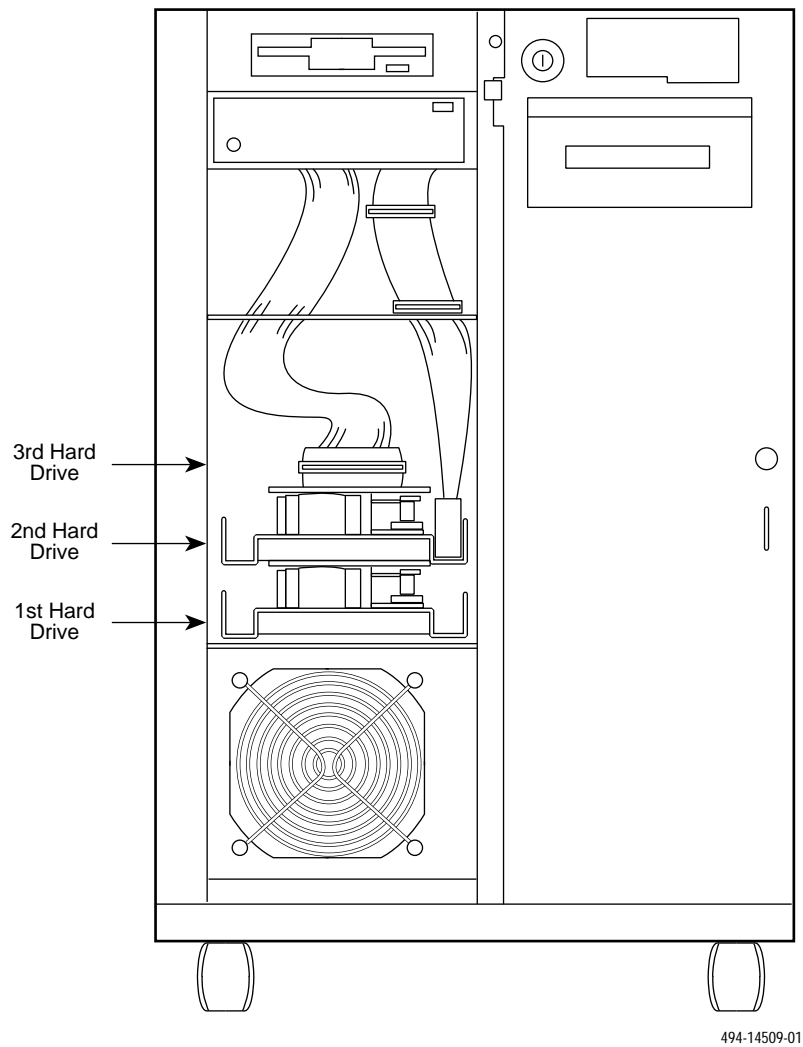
Altos 15000 Showing the Hard Disk Bay
